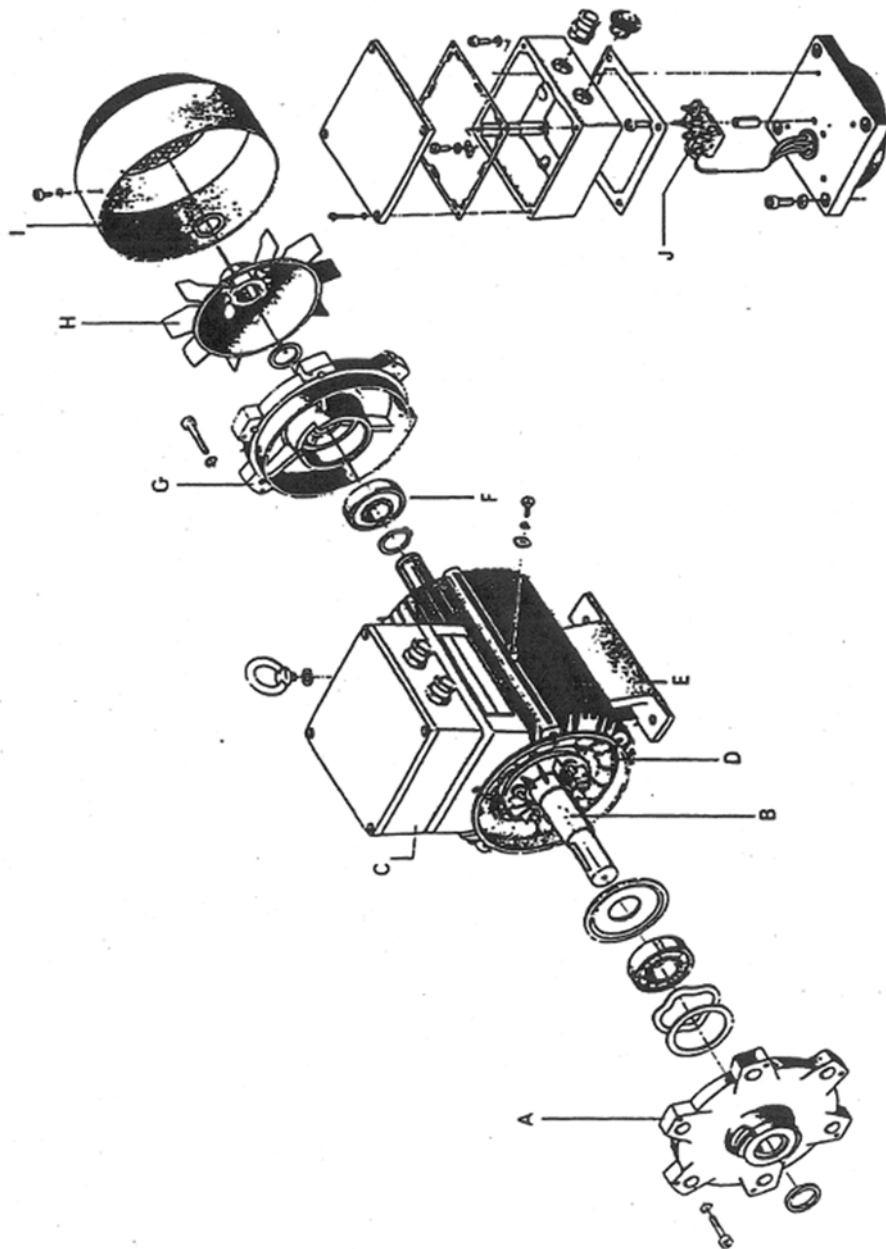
Exploded view of a SIEMENS three-phase TEFC SCI motor.
